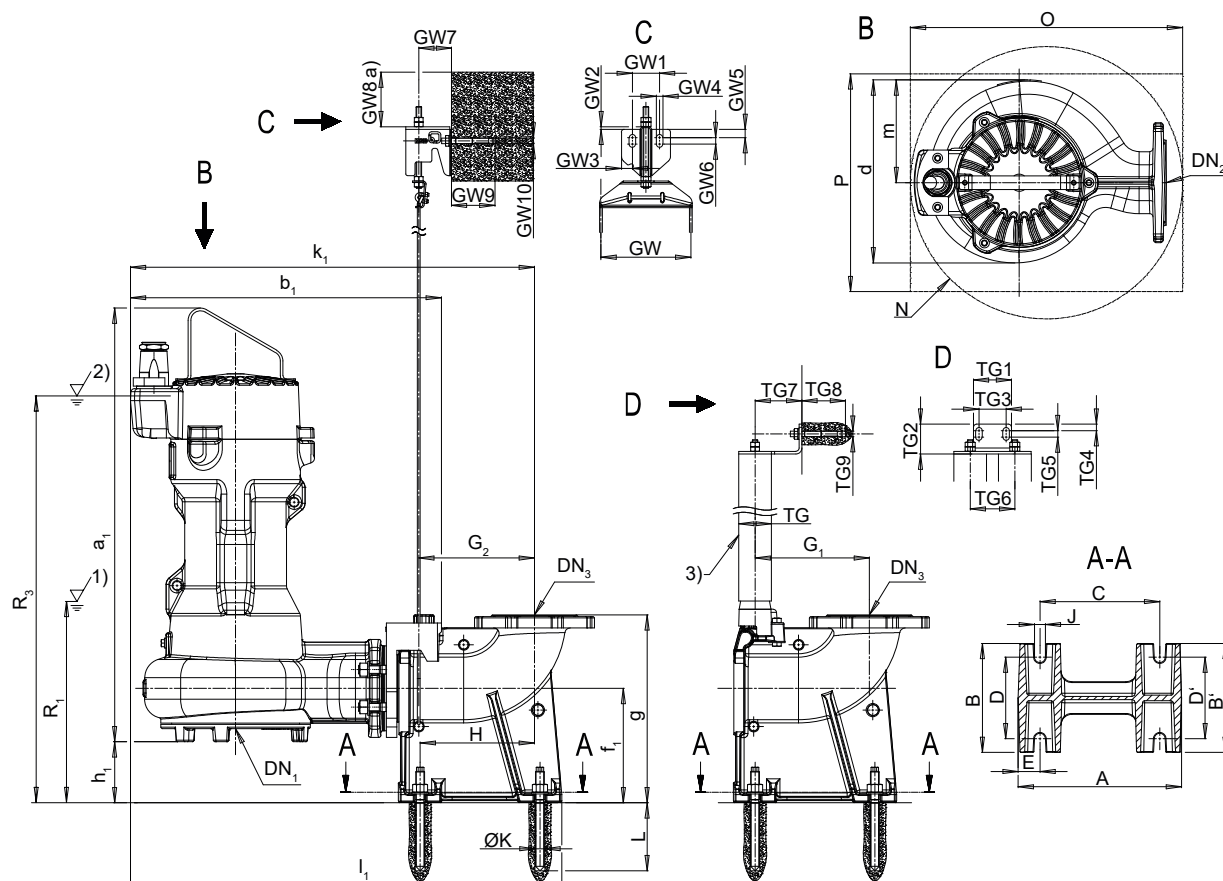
Dimensions of AmaRex Pro, DN 80 - DN 150, stationary installation, guide wire arrangement, twin guide rail arrangement [mm]
